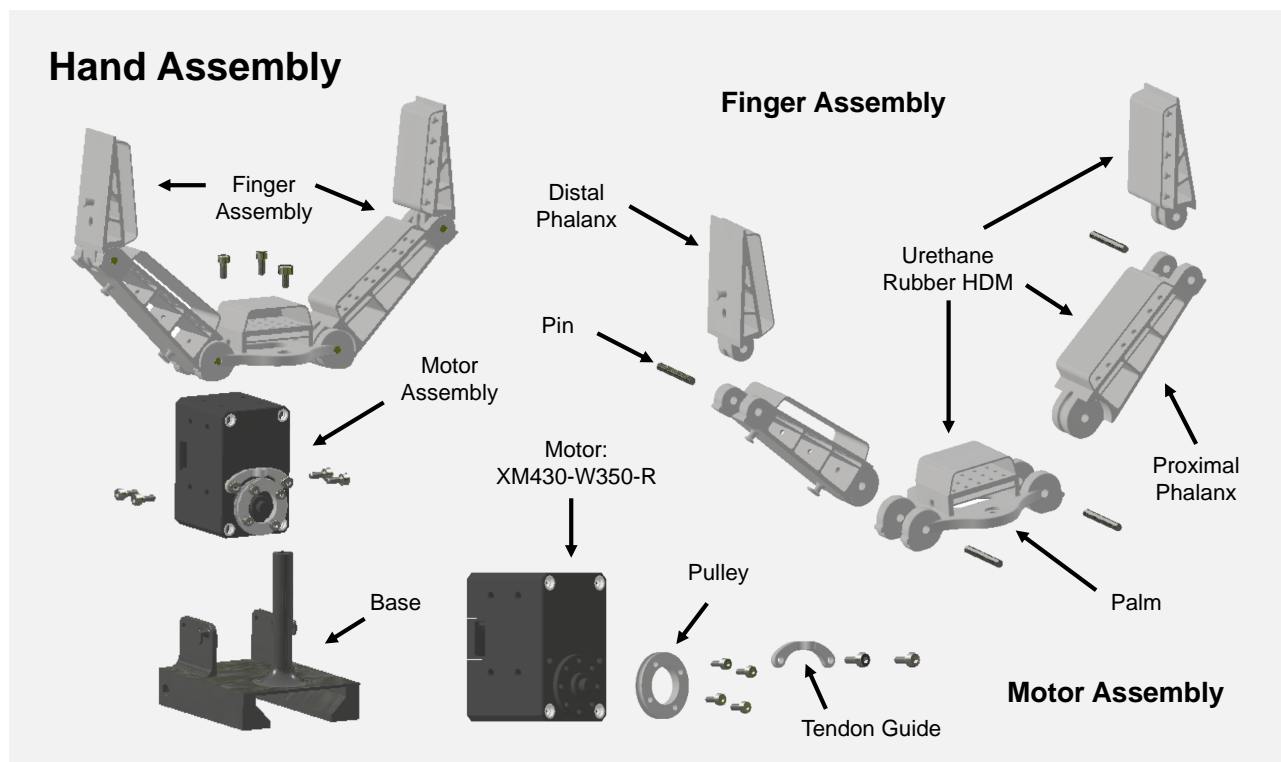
The proposed highly under-actuated prosthesis, exploded into multiple sub-assemblies that is the finger and motor assembly.
